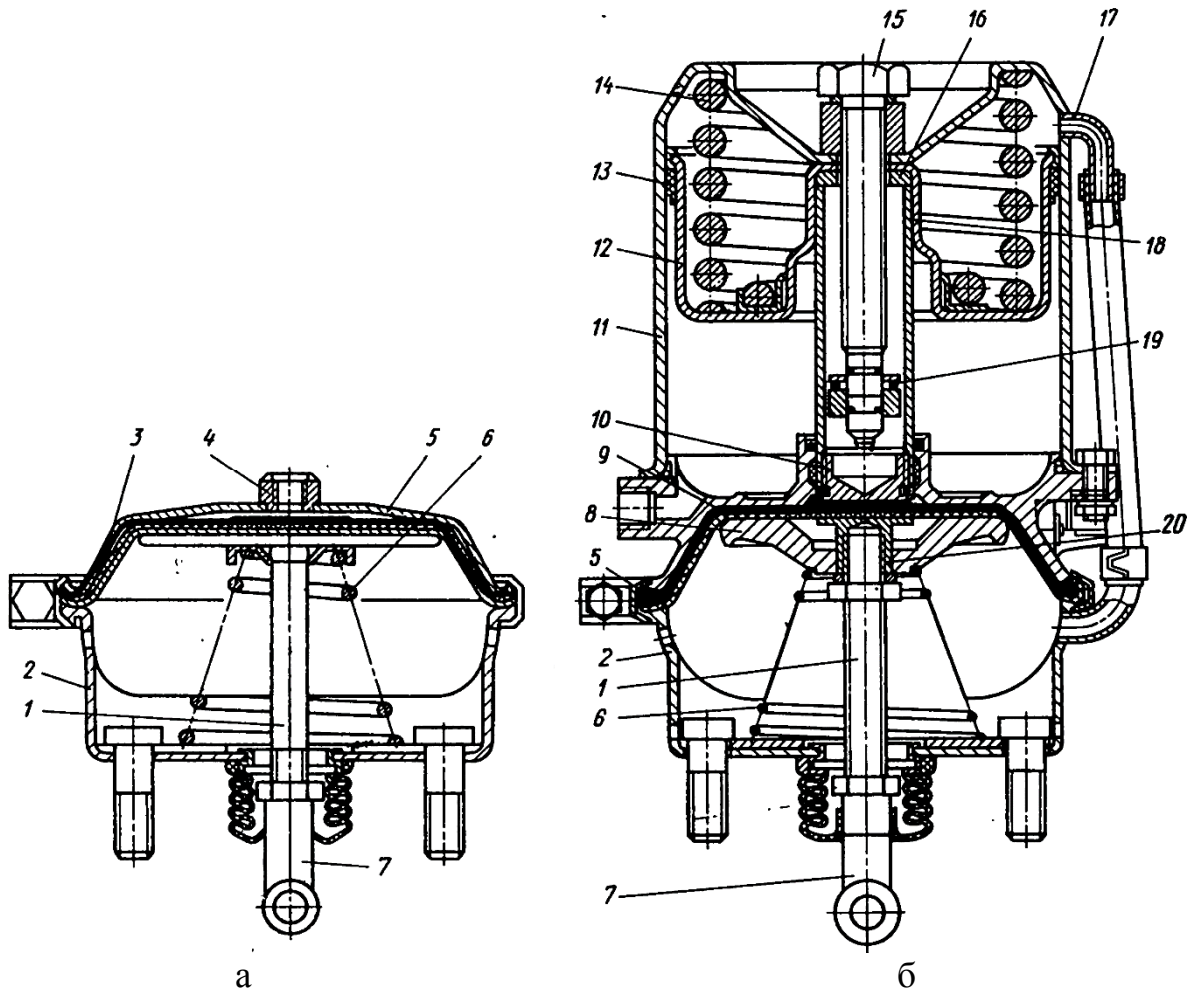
Brake chambers: a - normal; b - with spring brake; 1 - stock; 2 - framing; 3 - case cover; 4 - connector; 5 - membrane; 6 and 14 - springs; 7 - plug; 8 - disk; 9 - cylinder flange; 10- axial bearing; 11 - cylinder; 12 - piston; 13 - piston sealant; 15 - screw; 16 - thrust washer; 17 - drainage tube; 18 - pusher; 19 - bearing; 20 - cap nut
